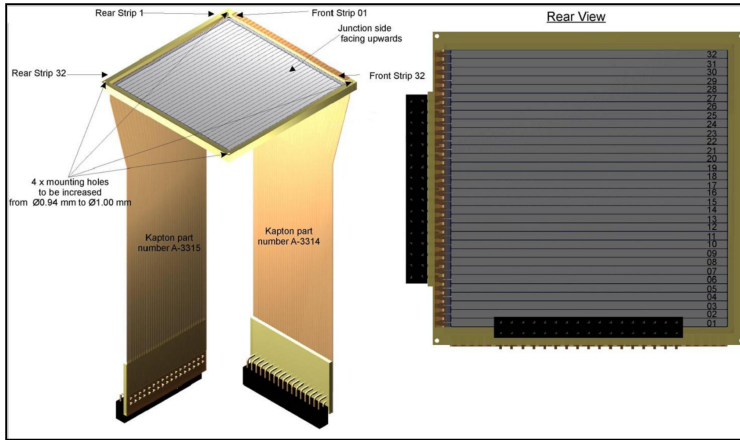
Technical drawing of a Double Sided Silicon Strip Detector together with its Kapton cables [33].
